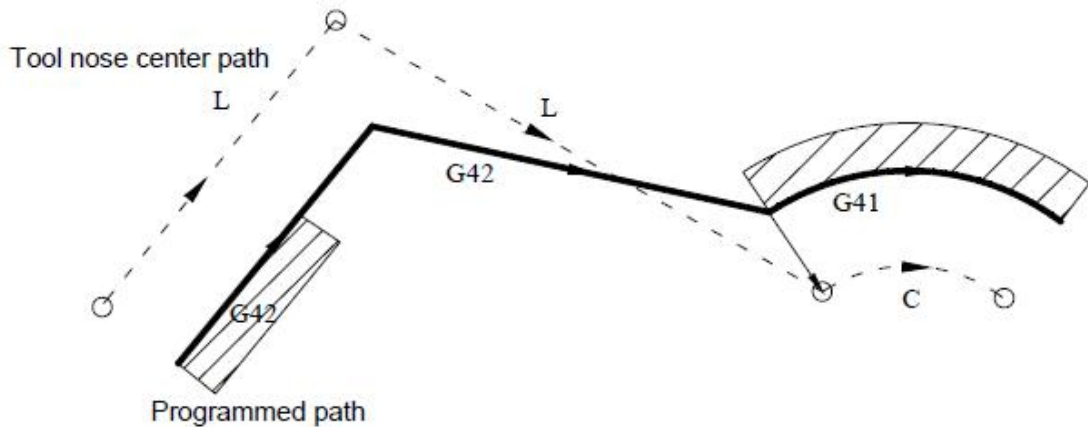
Linear—circular without intersection (changing compensation direction)
